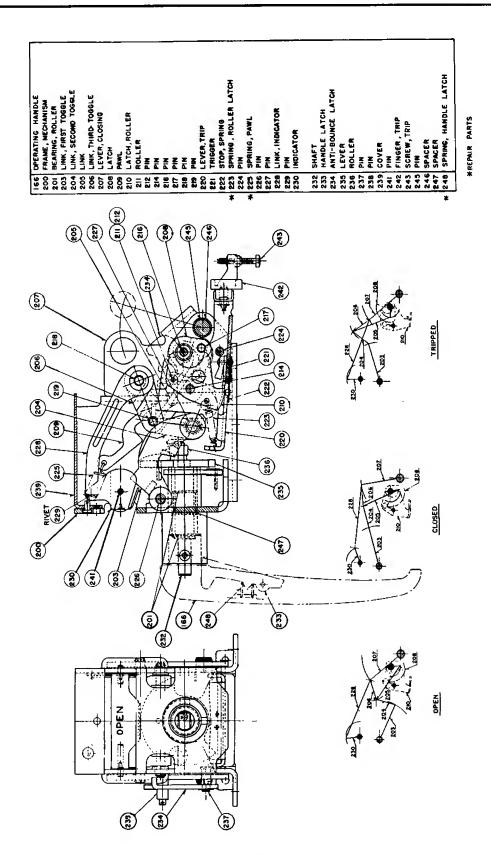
Breaker Operating Mechanism Assembly (Dwg. TP-56-191)
